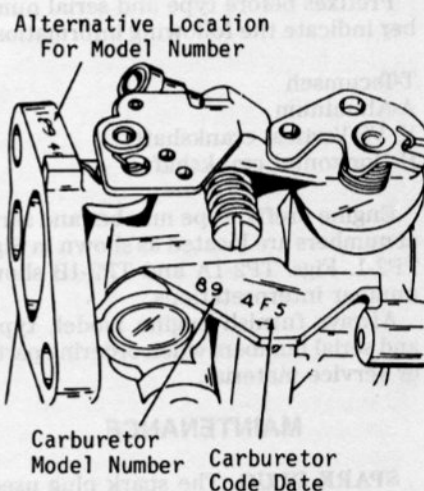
View showing location of carburetor identification number on Tecumseh diaphragm type carburetor.
